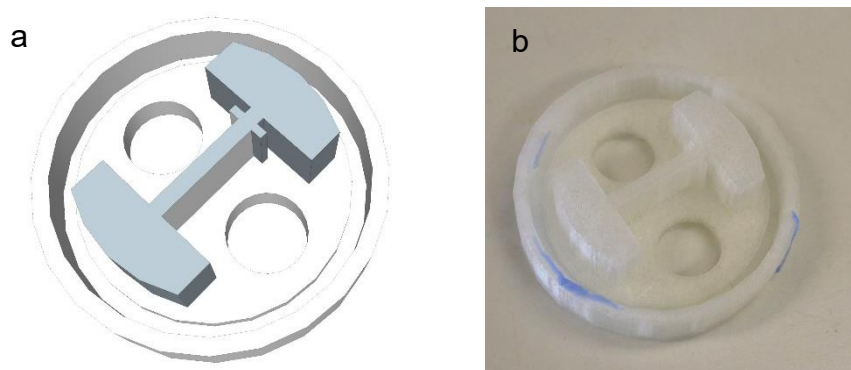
Second generation PLA mould CAD and 3D printed PLA mould.
